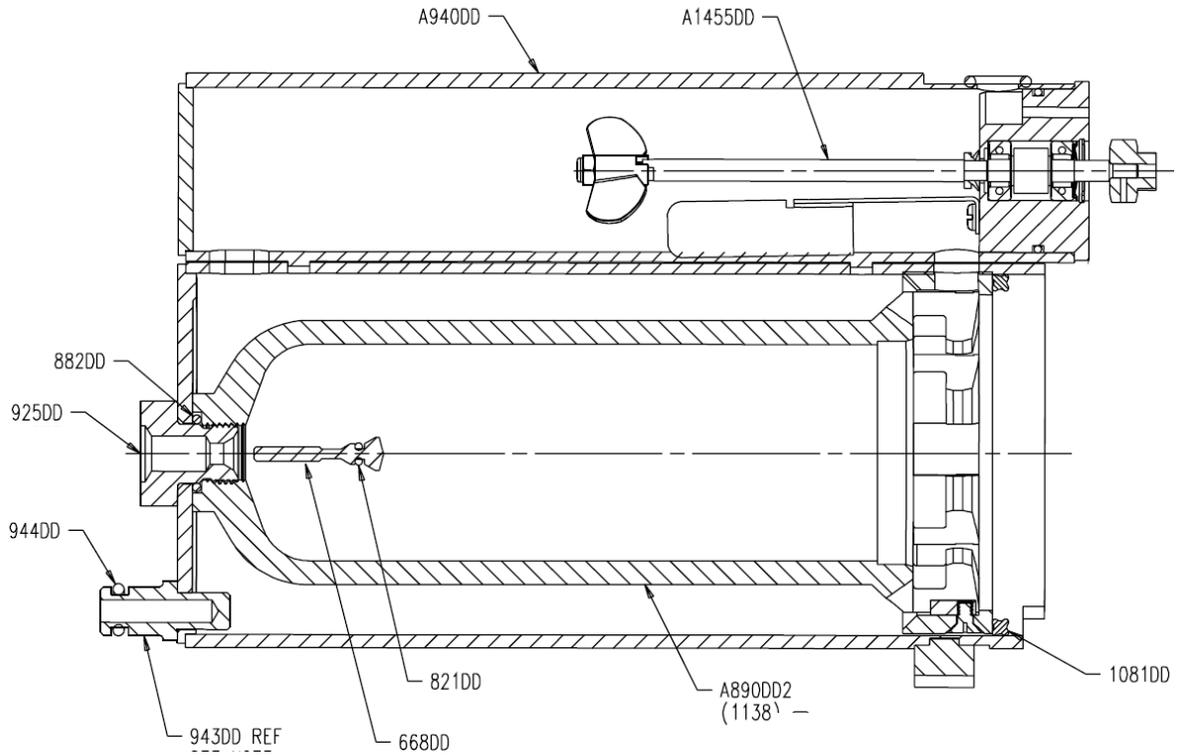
6400 Air Can Assembly, Cutaway Left
